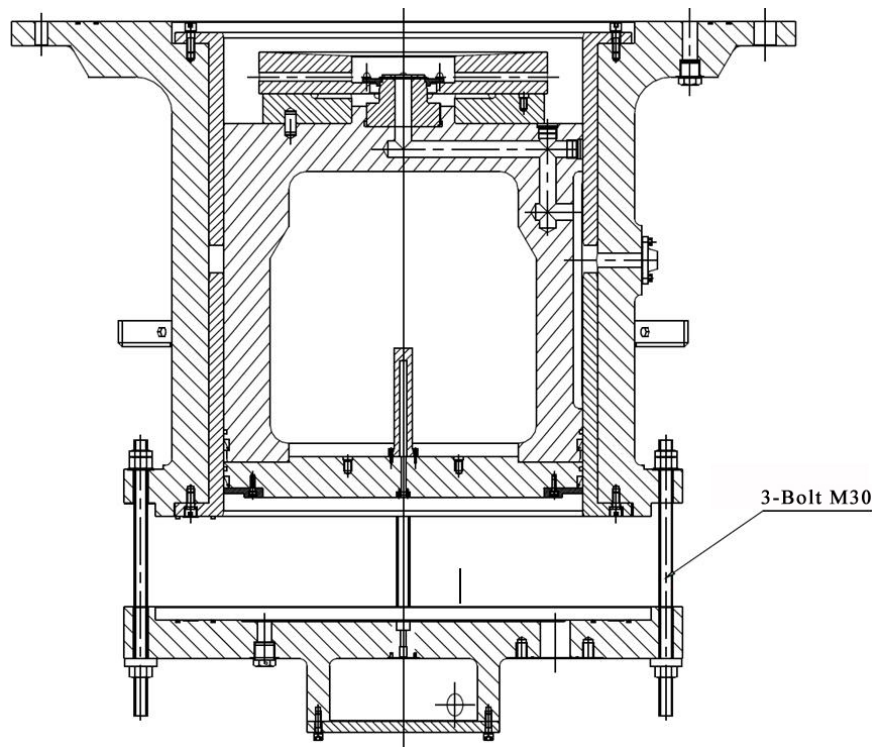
Installation of cylinder bottom of PXZ-1500II
